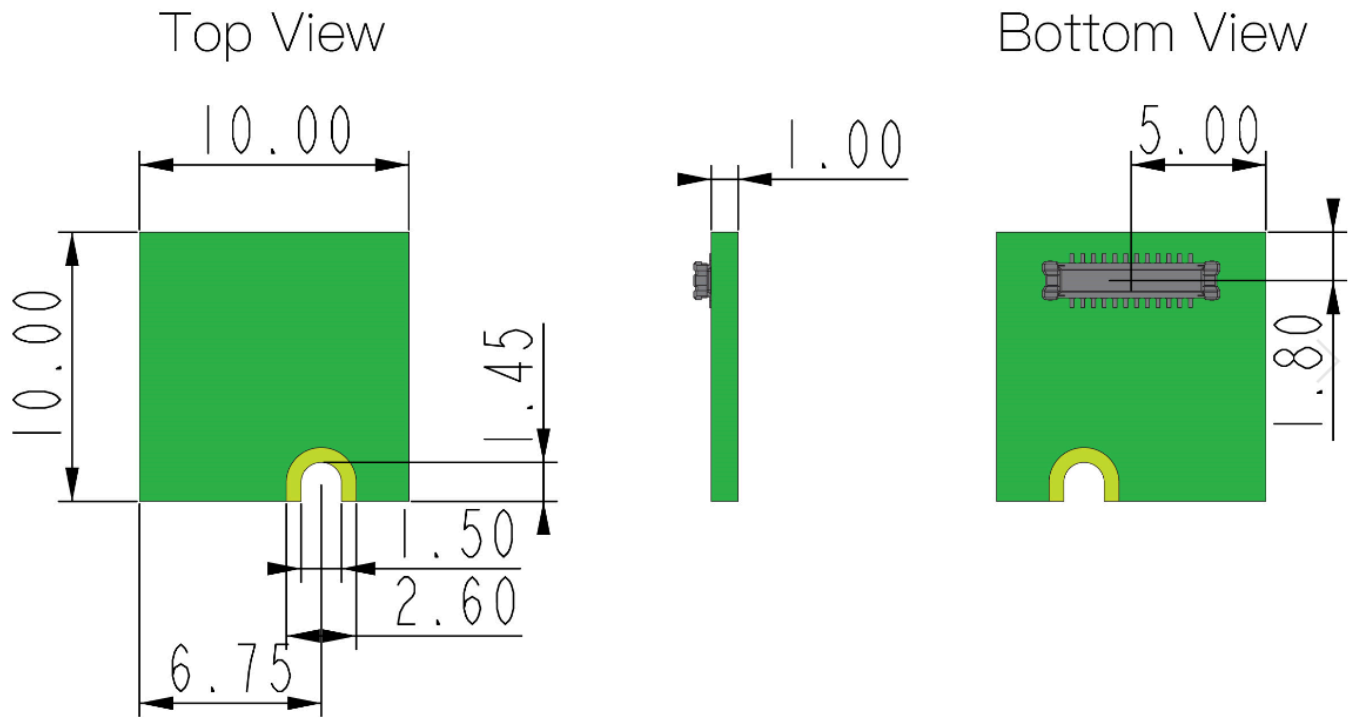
RAK15007 WisBlock FRAM Module Mechanic Drawing
